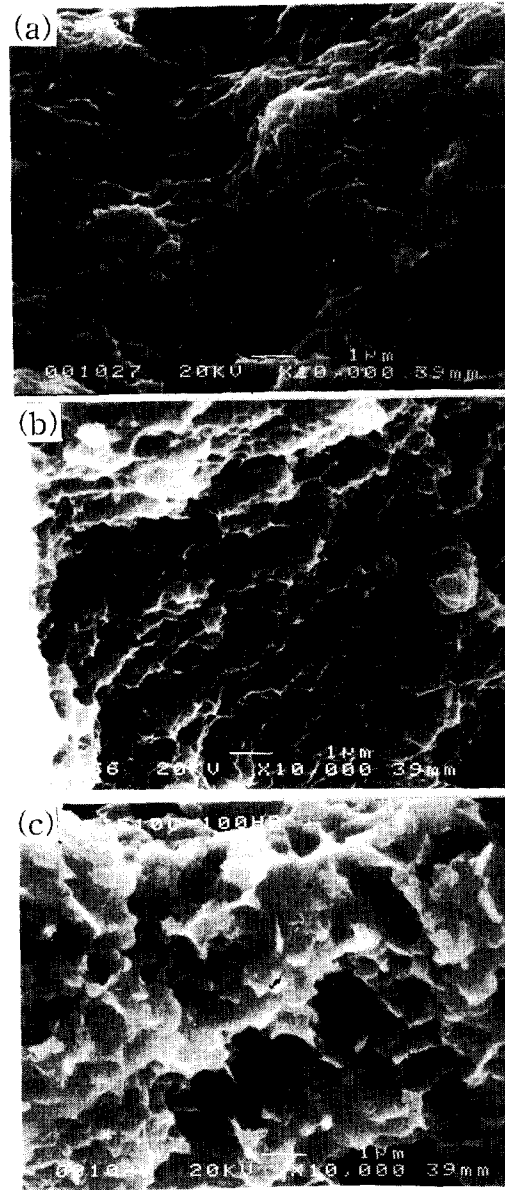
Fracture surfaces of the 100hrs-aged Al-8wt.%Ti specimen tensile tested at (a) 25°C (b) 400°C (c) 510°C.
